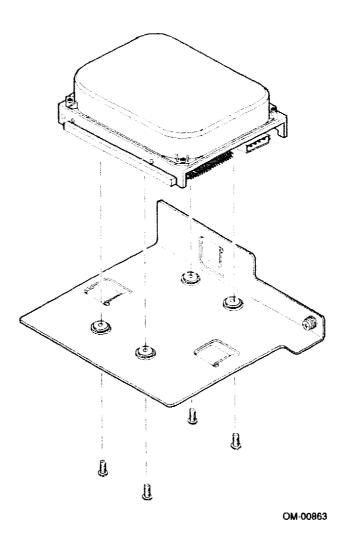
Removing the 3 1/2-Inch Drive from its Mounting Tray
